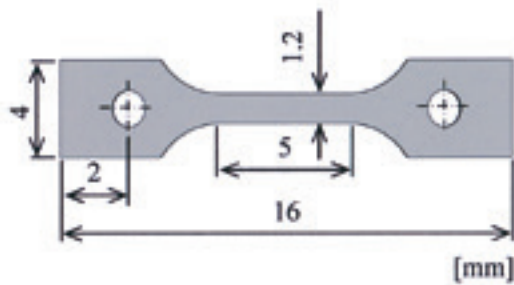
Shape and dimensions of small specimen (SS-J3 type)
